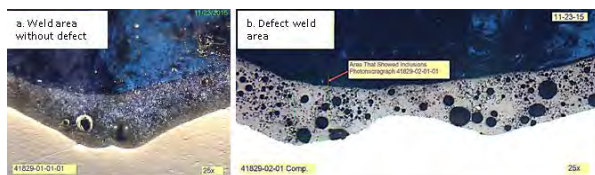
Cross section between enamel layers and weld area (a) without defect and (b) with the defect
